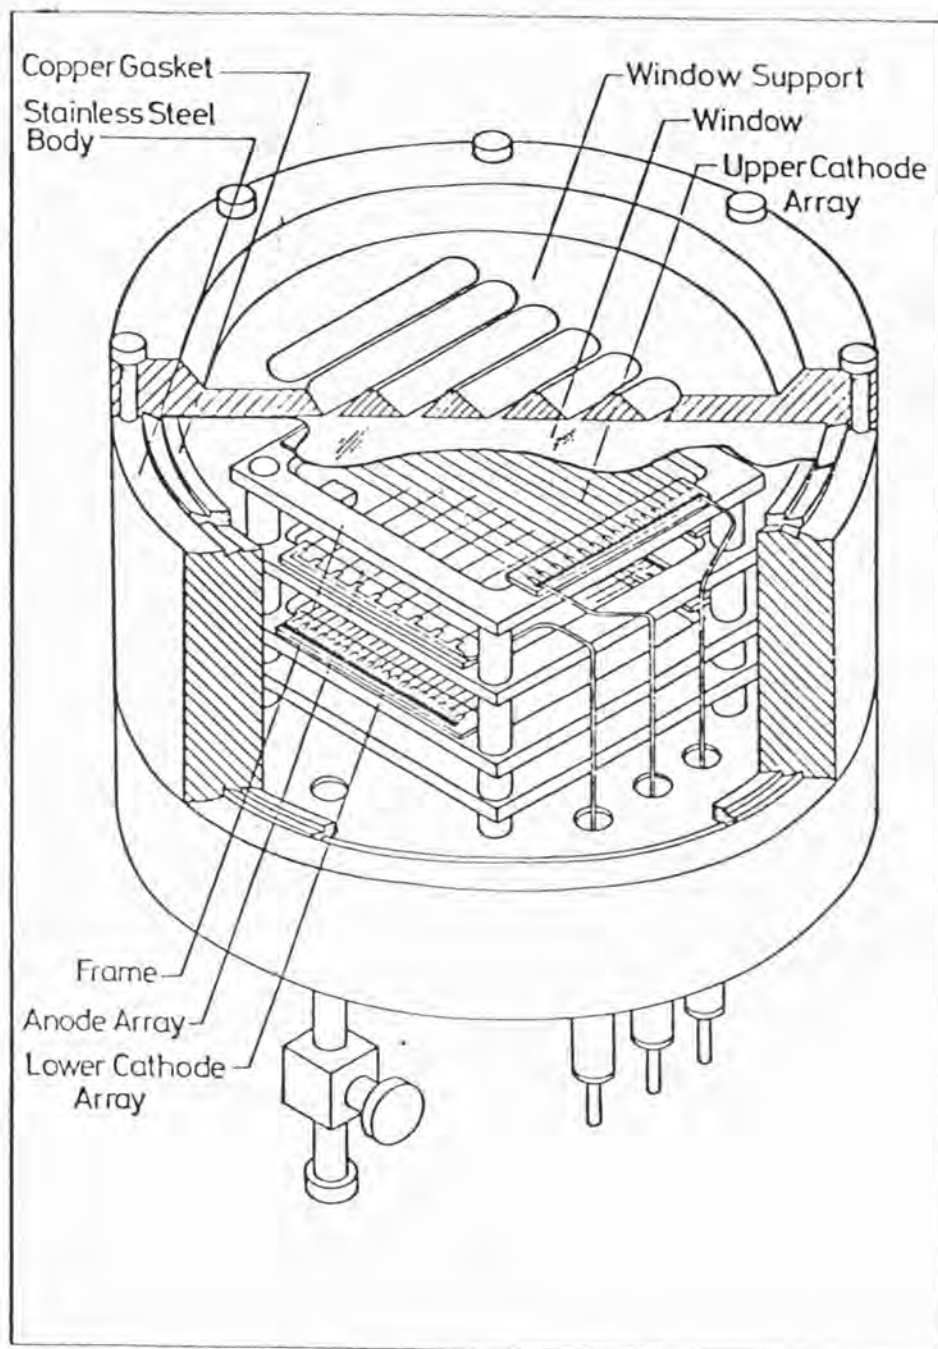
Schematic cross-section of prototype IPC. Window support depicted is for the one-dimensional position sensitive IPC constructed during this work.
